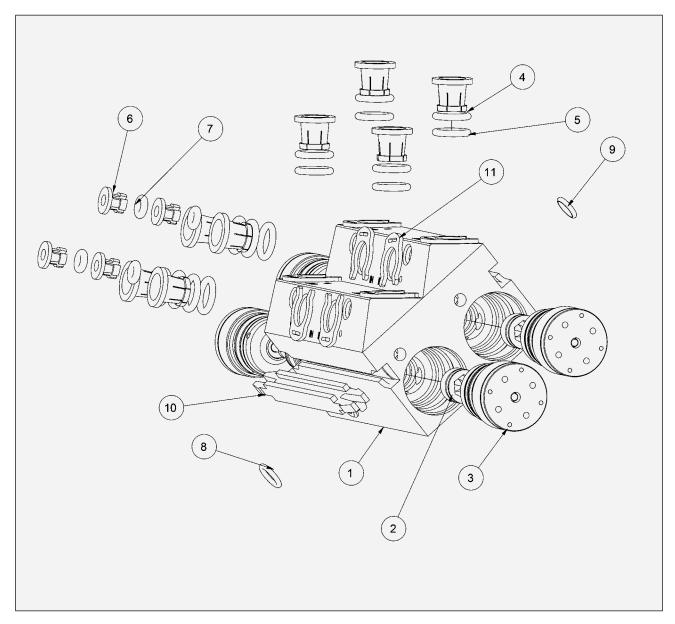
A10728 (Metric) & A10961 (English) 4-Color Valve - Daisy Chain Assembly
